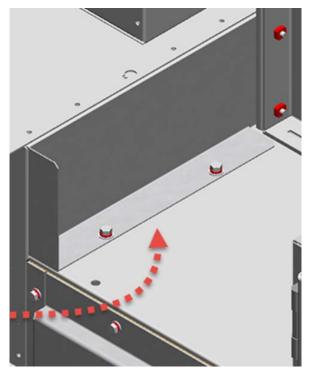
Secure the upper bracket to the roof of the Transition Frame
